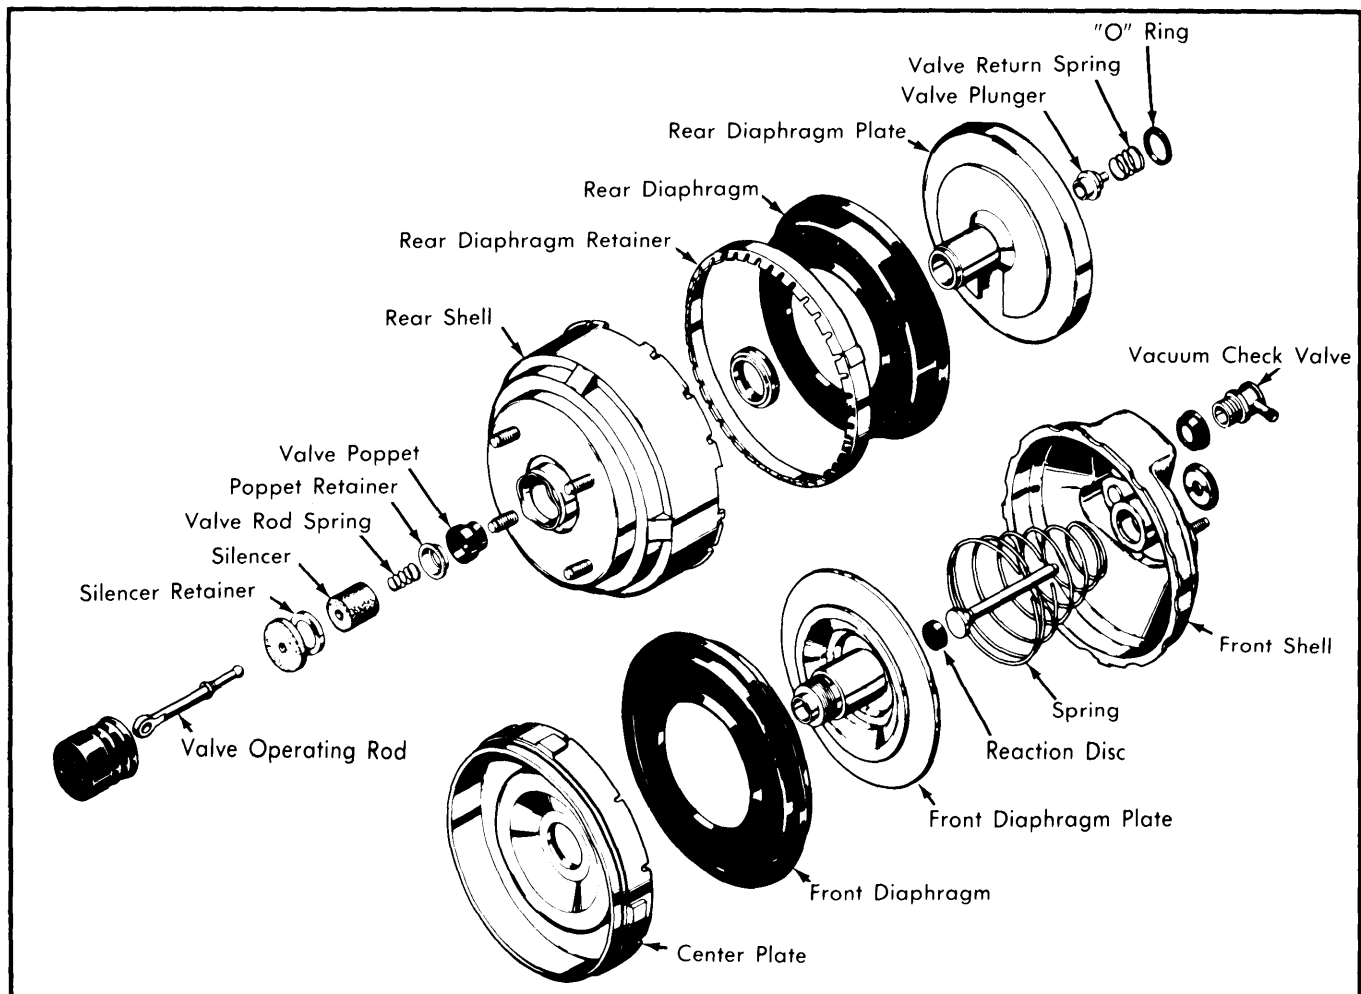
Exploded View of a Typical Bendix Tandem Diaphragm Power Brake Unit
